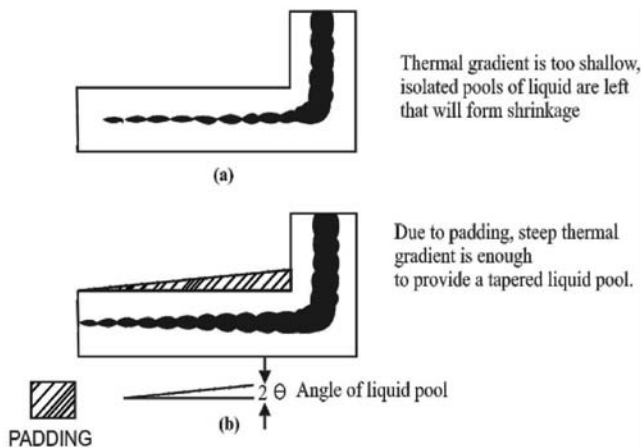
Illustration of a plate like casting (a) with and (b) Porosity (adapted from ⁸)
